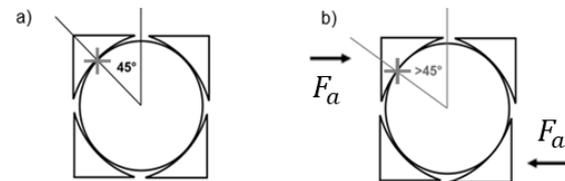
Bearing under axial load  $F_a$  a) before contact angle change b) after contact angle change
